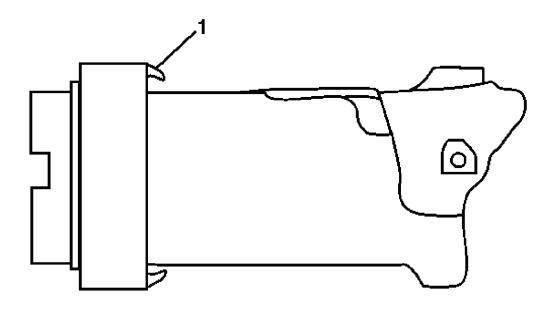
Inspecting Bearing & Adapter Assembly Tab For Breakage Courtesy of GENERAL MOTORS CORP.
